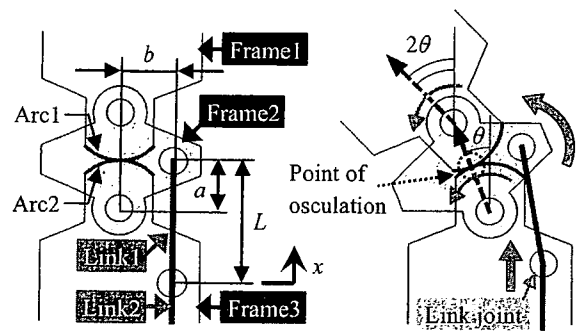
Basic concept of 1-DOF bending mechanism. Left is component and dimension of the mechanism. Right is rolling of Frame1 around Frame3 jointed with Frame2 by linear motion of Link joint.
